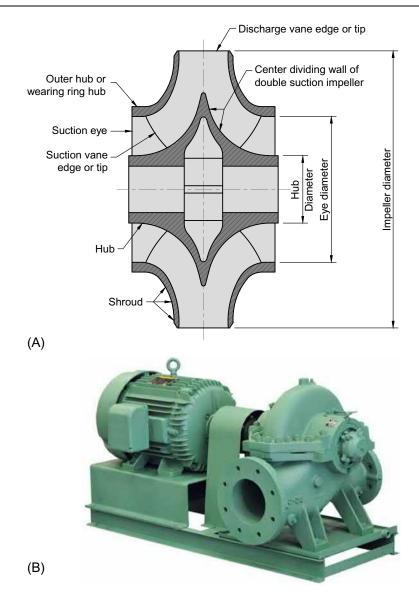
(A) Example diagram showing the parts of a double-suction impeller. Courtesy of McGraw Hill. (B) Horizontal split-case pump with a double-suction impeller.
